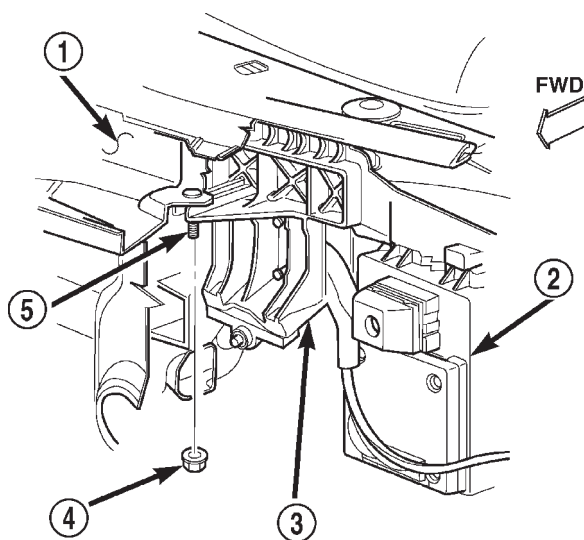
Instrument Panel to Cowl Plenum Mounting
